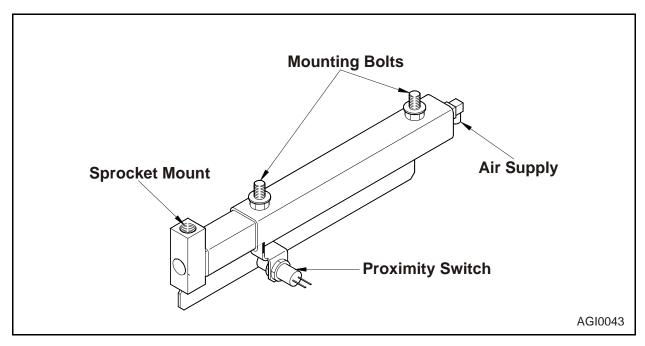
29 Air-Actuated, Chain-Tensioner
